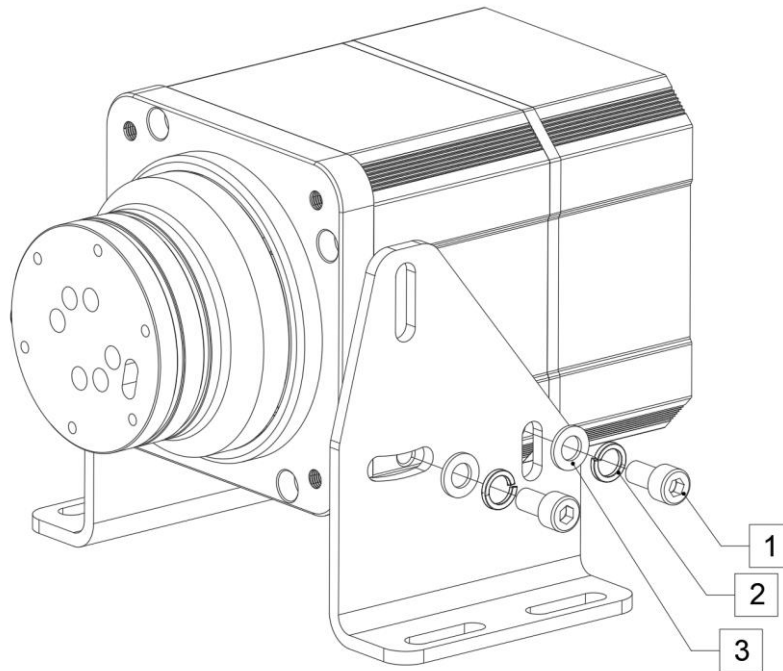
Mount VNM Wheelbase Premier, Elite, Supreme with side mount bracket. Wheelbase Premier, Elite. Supreme are mounted with 4xM8 bolts length 20mm with 1,25mm thread pitch (1); 4xM8 spring washers (2) and 4xM8 flat washers (3).
